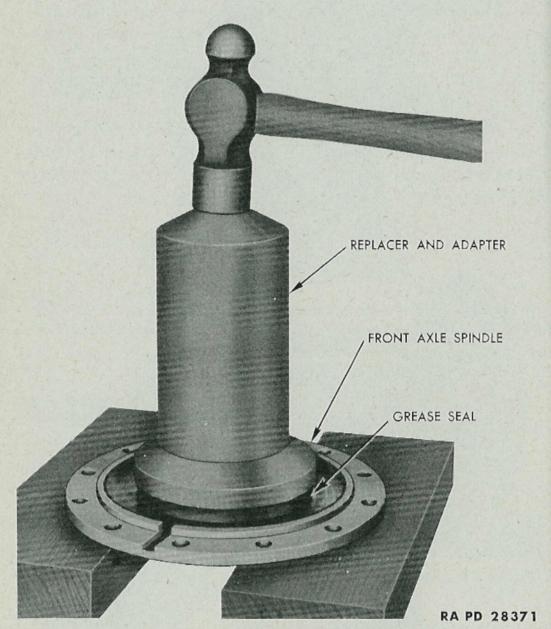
Installing Hub Inner Grease Seal on Spindle with Rep!acer 41-R-2394-130 and Adapter M8-121
